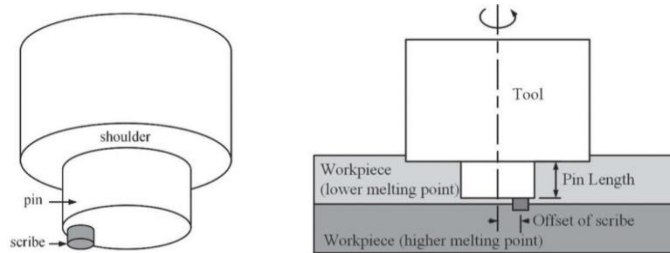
Geometrical Information of tool used for the welding with tilted scribe
